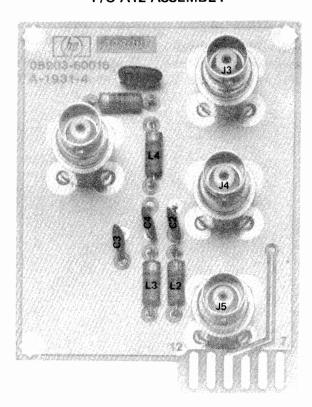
P/O A12 Connector/Filter Assembly Component Locations (DAC and Counter Trigger Circuits)
